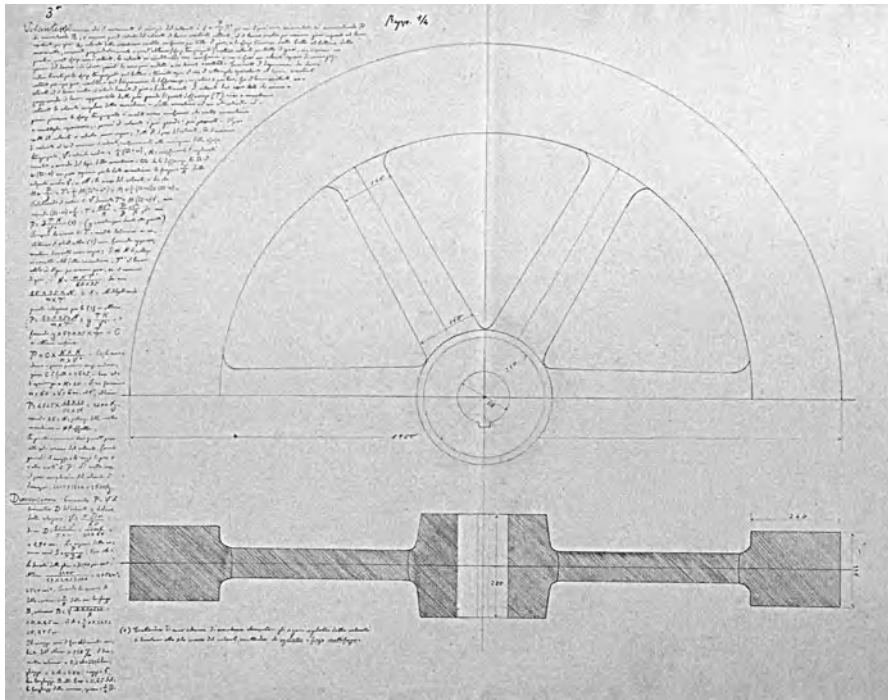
Didactic drawing of a flywheel, with some notes by the student
